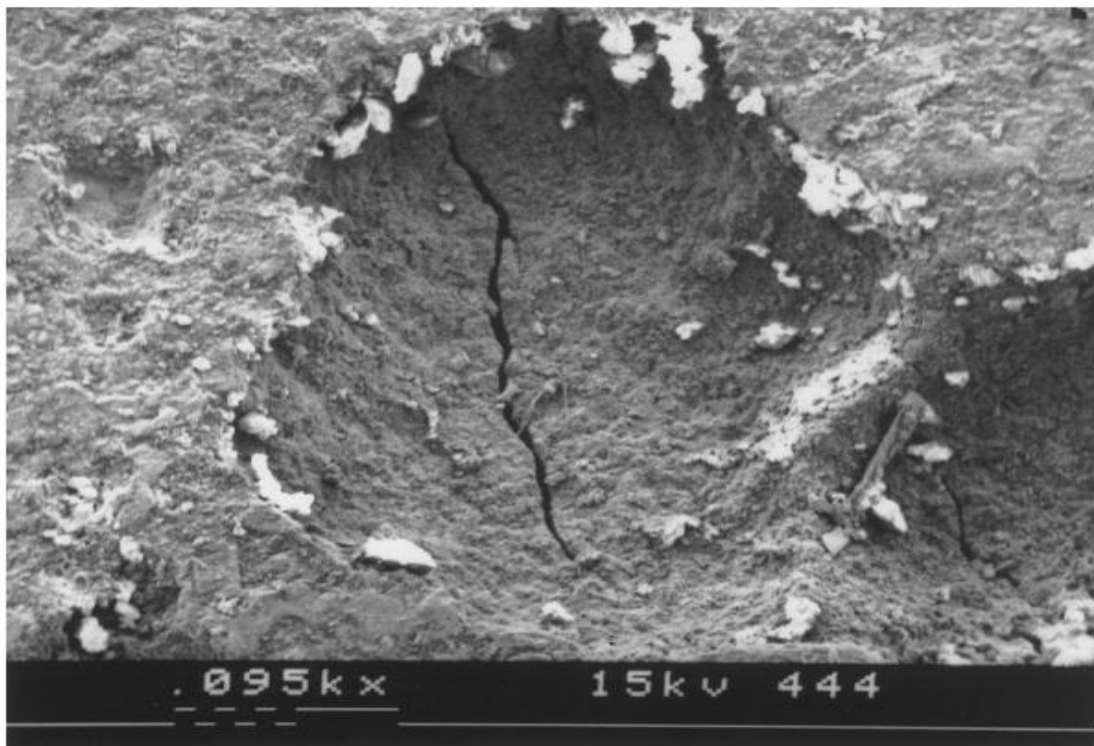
Fatigue crack initiated at the bottom of a pit [35]
